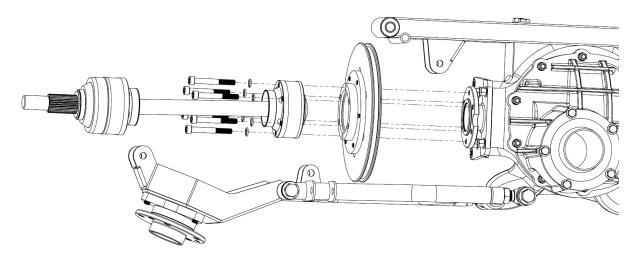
Assemble the CV shafts using the M10 bolts and lock washers (Some parts removed for clarity)
